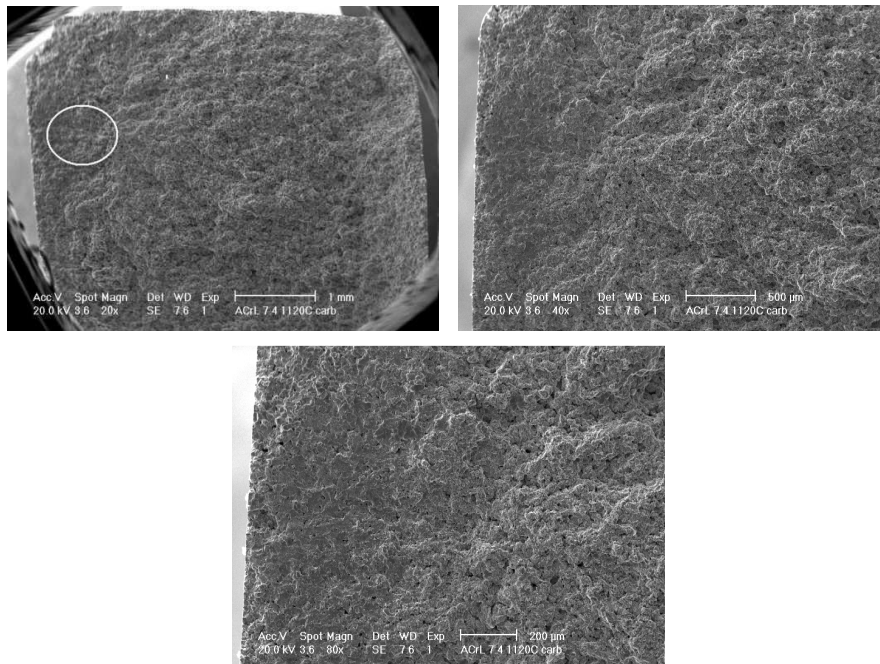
fracture surface of carburized 7.4g/cm<sup>3</sup> 0.2%C ACrL sintered at 1120°C
